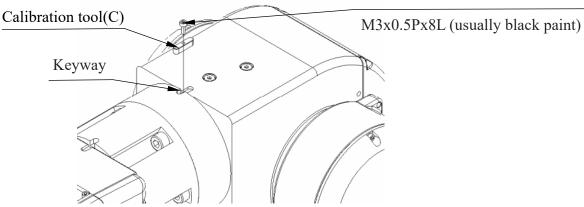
(b) Illustration of RT605-909-GB J4-axis Zero-position setting
